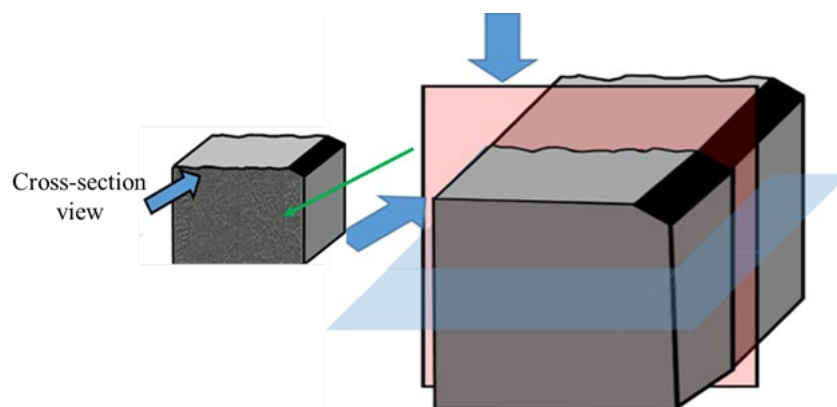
Illustration of cross-sectioned Charpy sample observing the fracture path.
